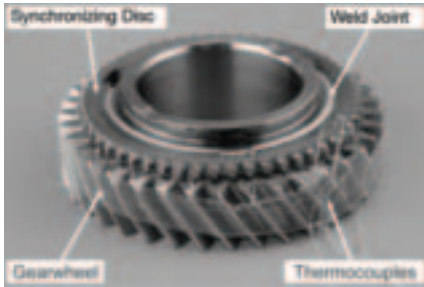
The photo of the gear wheel that is the target of this demonstration is shown with thermocouples, which are used for evaluating the heat source model.
